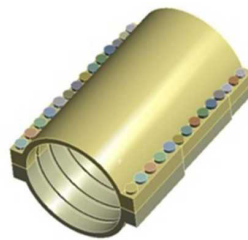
3-D model of Steam Turbine Casing with Bolts
